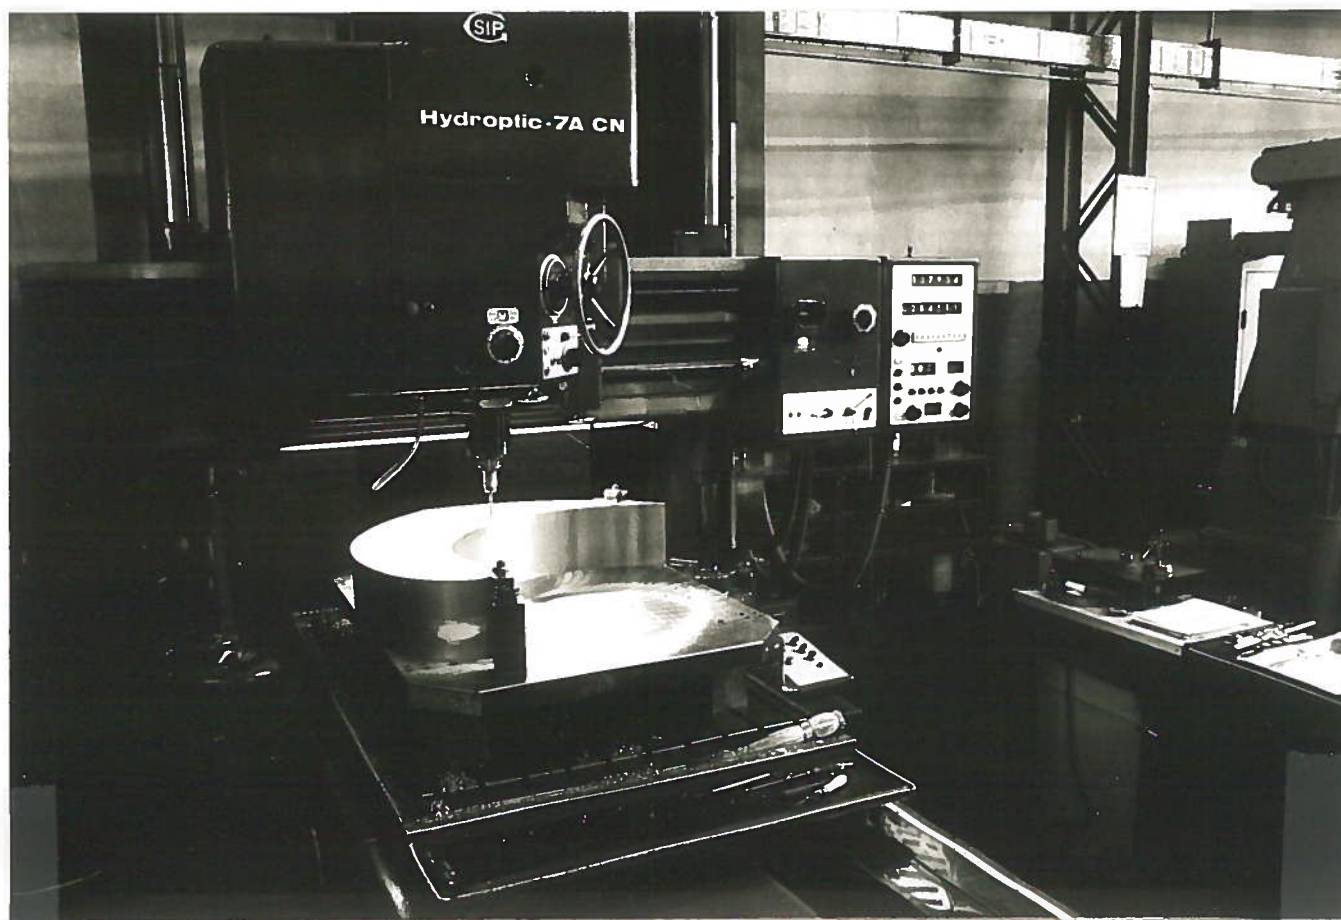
View of an upper sector during drilling of holes and screw threads machining with numerical controlled machine.
